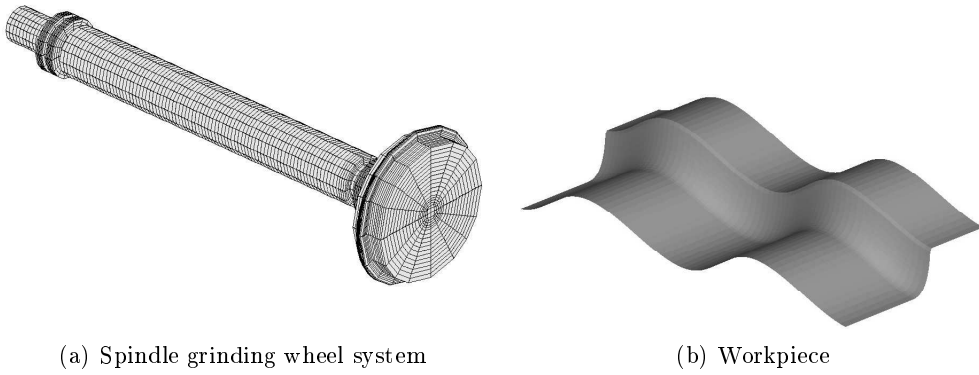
Geometry of the spindle grinding wheel system and of the workpiece
